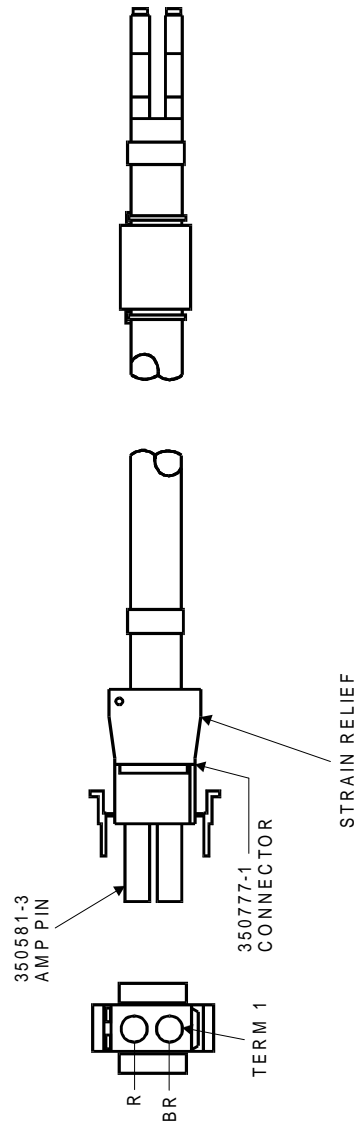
ED-7C818-32, Group 6 Cable Assembly
